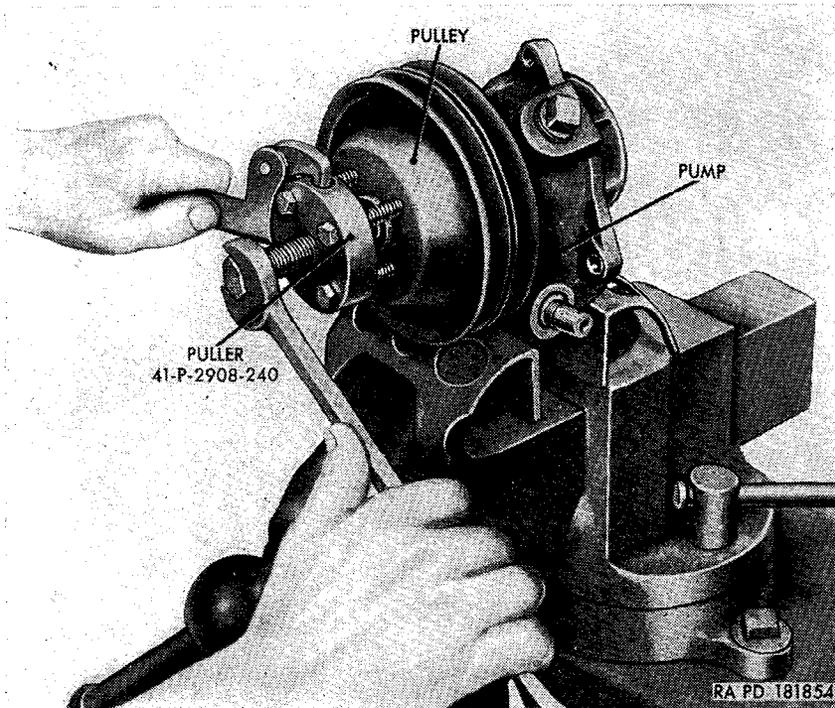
Removing fan and water pump pulley from water pump assembly, using puller—41-P-2908-240.
